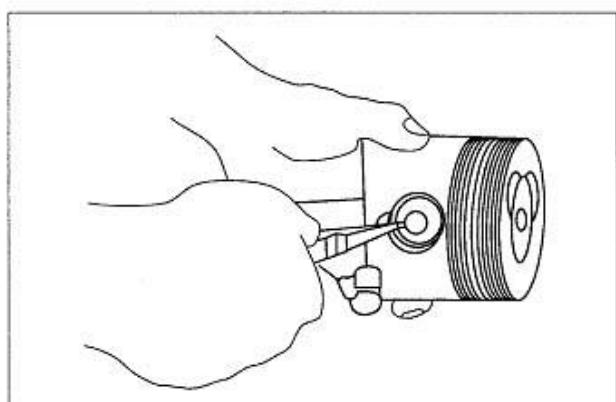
Disassembly and Reassembly of Elastic Ring with the Sharp Pincers
